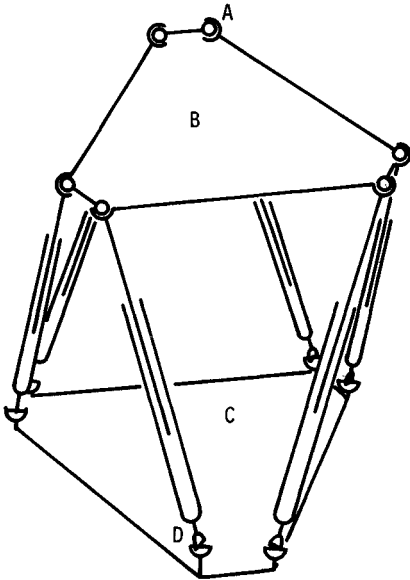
Schematic drawing of the Stewart platform. A, ball-and-socket joint; B, movable platform; C, fixed base; D, Hooke joint. The movable platform is supported on six legs.
